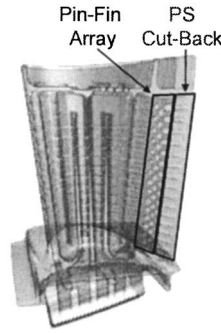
Cross-sectional view of a turbine blade with pressure side cut back
